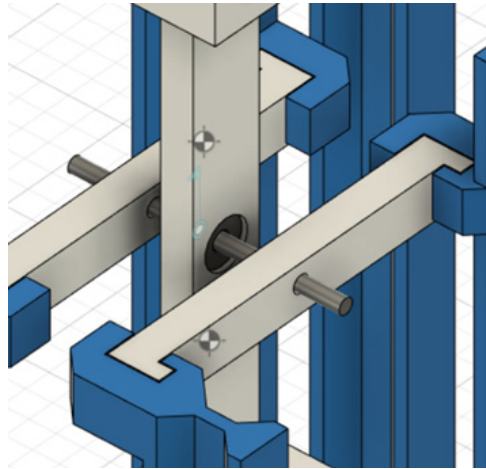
The rotating part that is able to move due to a rotational ball bearing
